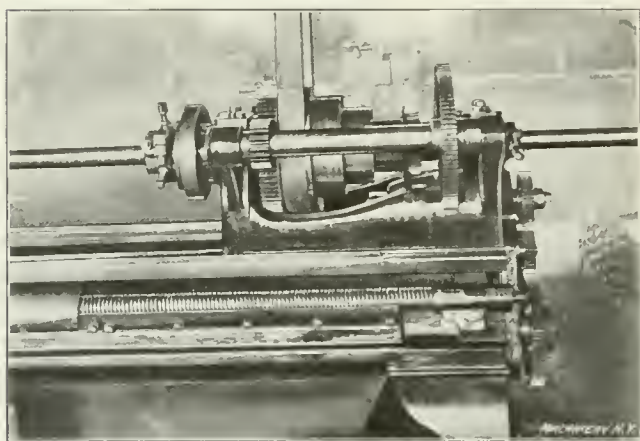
Rear View of Lead-screw Lathe showing Master Lead-screw
